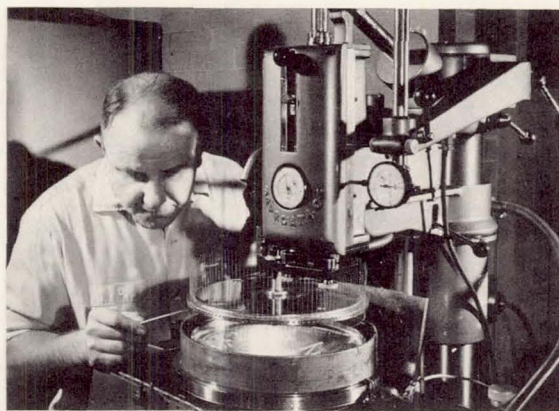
Multiple drilling machine. Electric-discharge machining.
